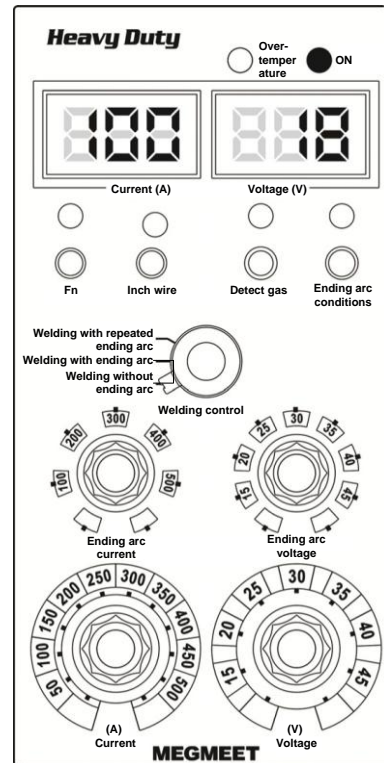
Selecting the mode of welding without ending arc
